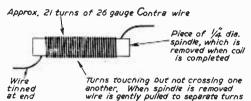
The 100 mA shunt. The shunt is wound on a 1/4 in. spindle which is then removed.
